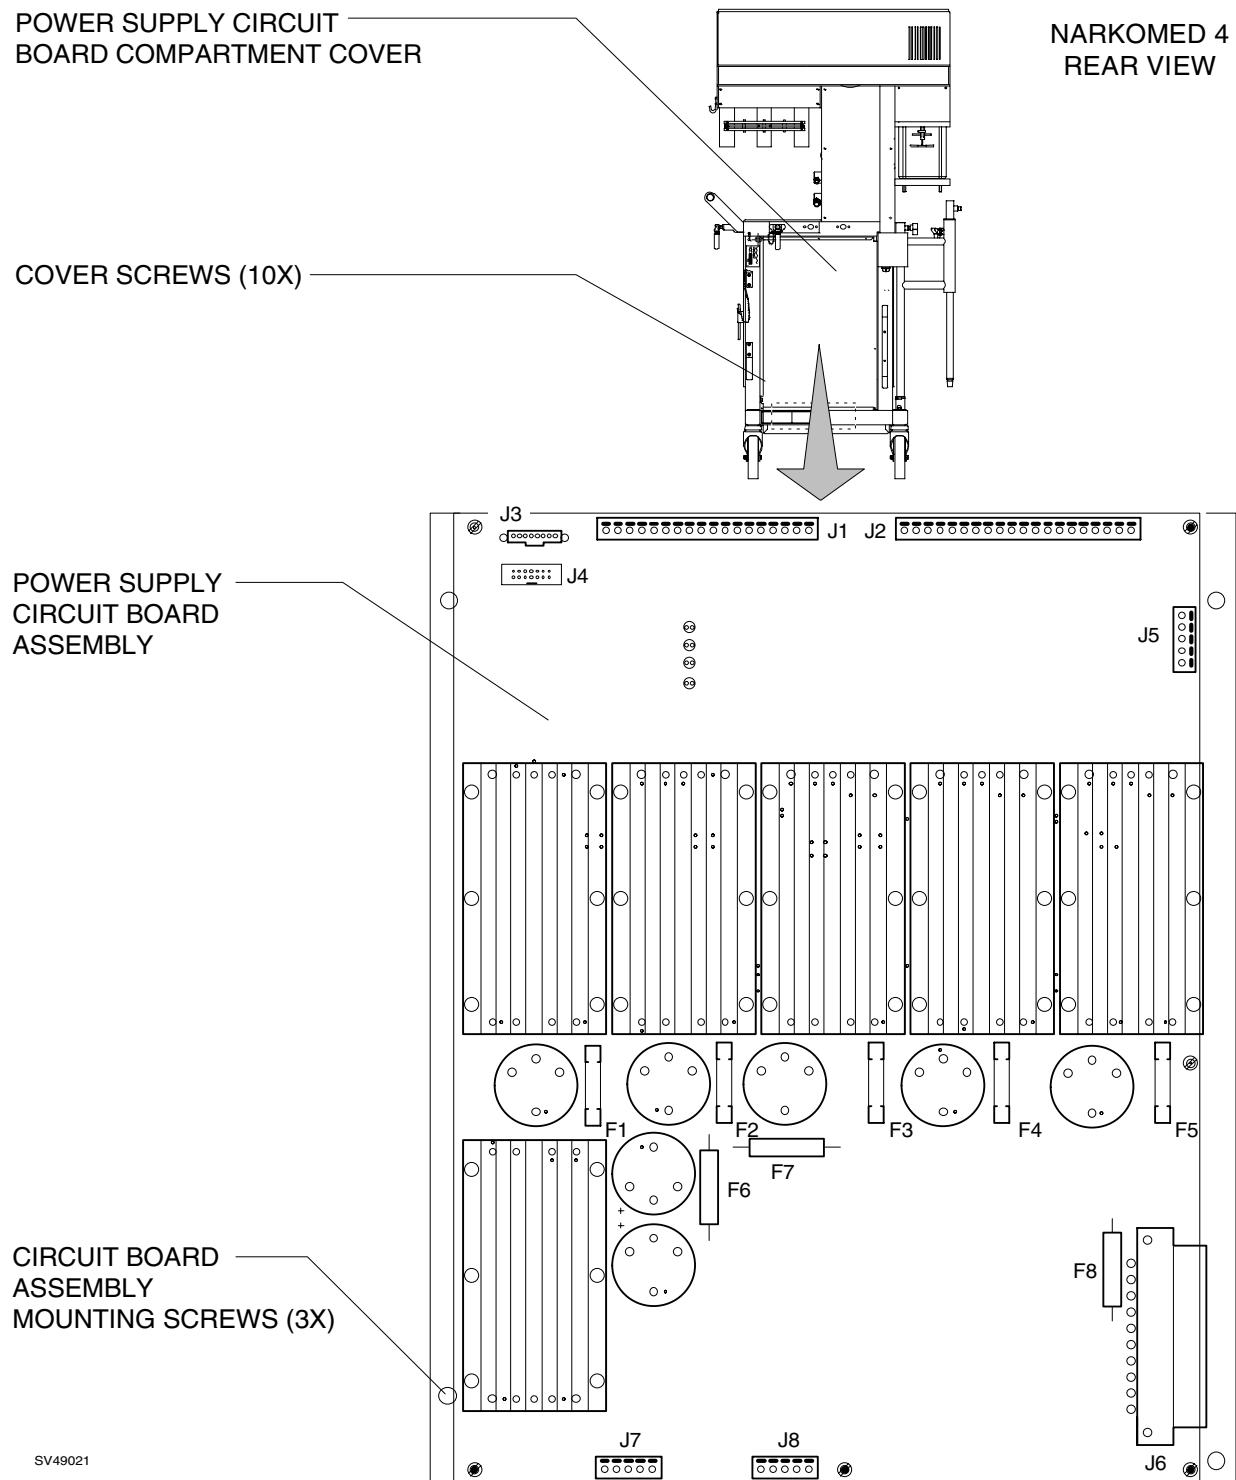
POWER SUPPLY CIRCUIT BOARD
